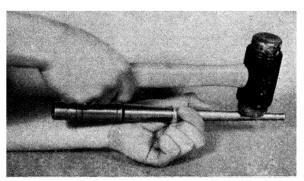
To remove a cabochon from a mounting, loosen the bezel around the stone with a penknife, place ring on mandrel, hold as shown, and strike end of mandrel a sharp blow.
